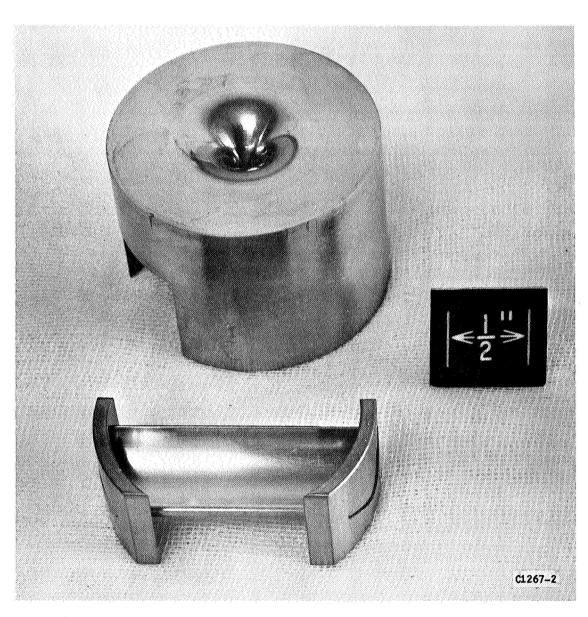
First Stage Nozzle and Blade Assembly (Mo-TZC) for the Turbine Simulator of Corrosion Loop I (T-111). (Orig. C67072546)
